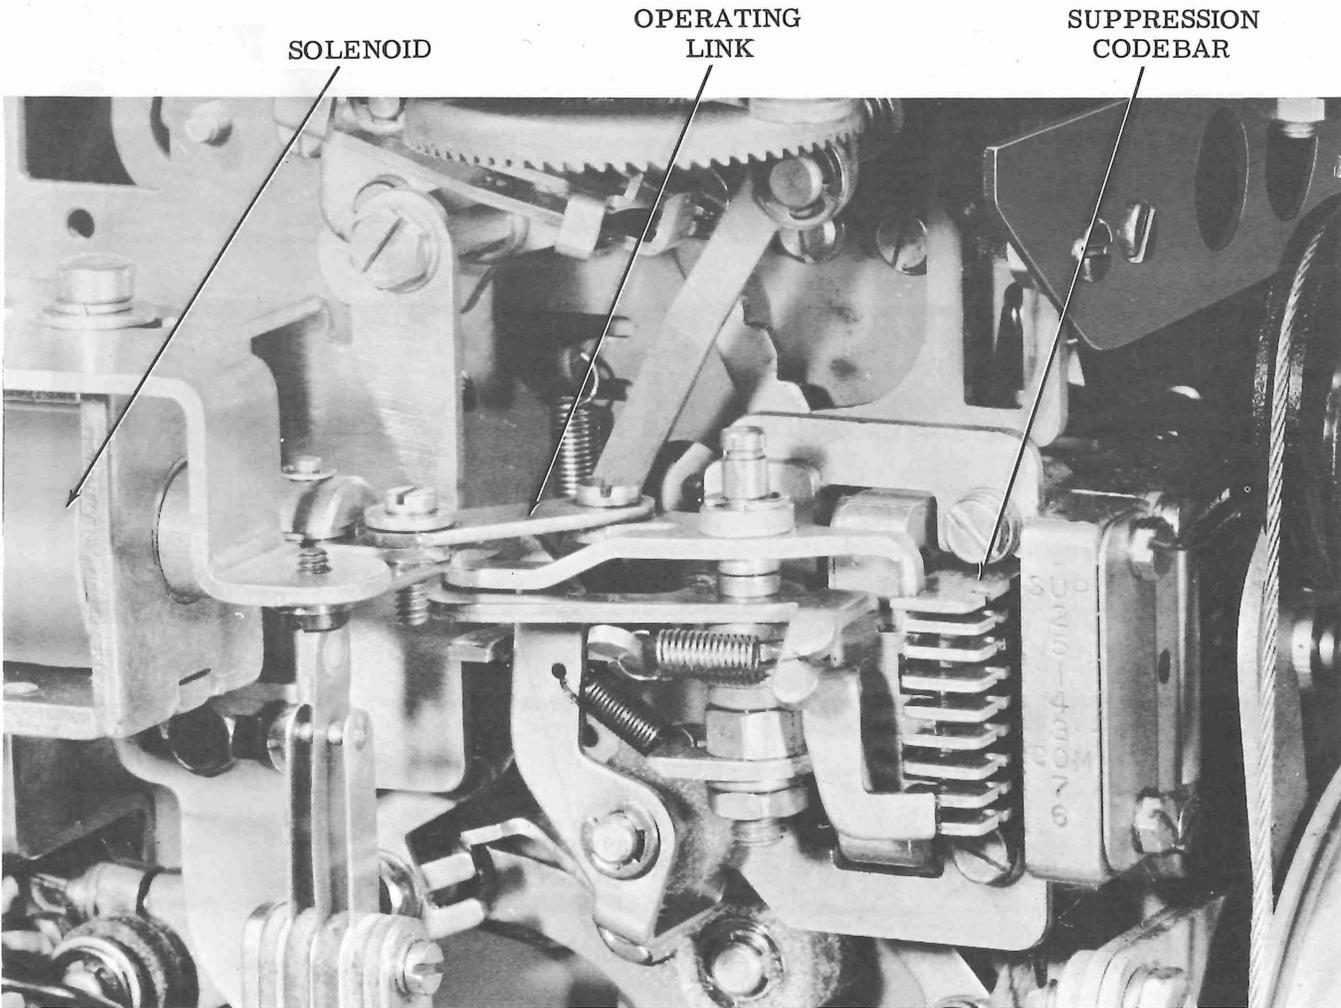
Print Suppression Mechanism Mounted on Typing Unit
